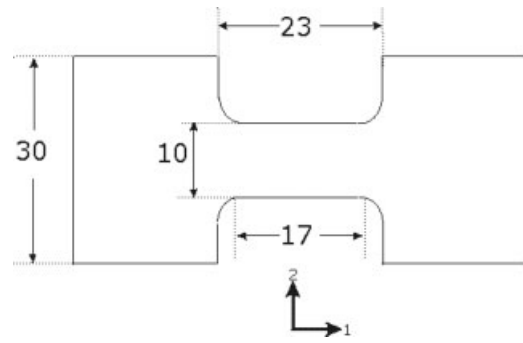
Specimen dimensions in millimeters. Stretching is along 1.
